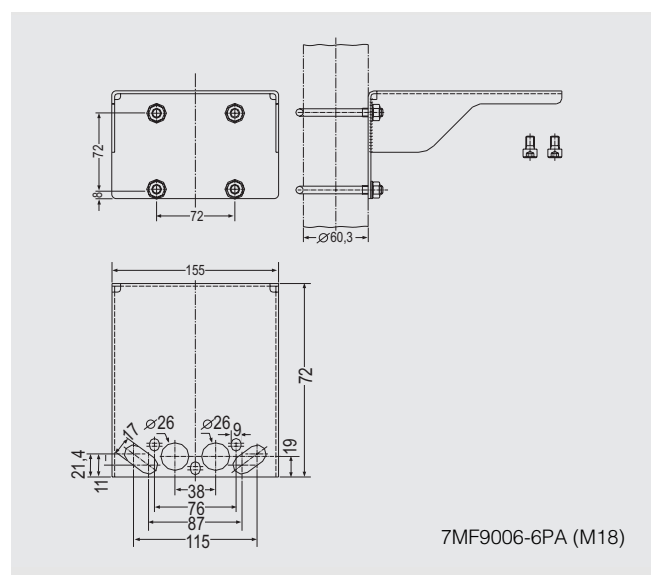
/104 Mounting bracket for five-spindle valve manifolds, dimensions
